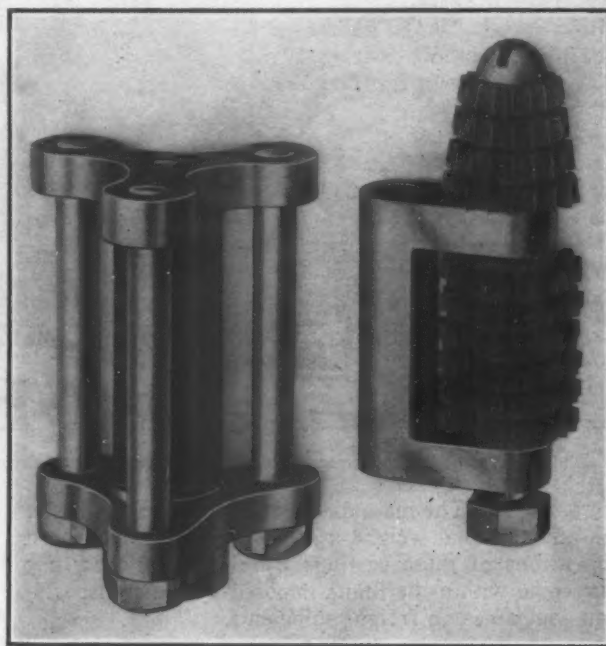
View Showing the Spider and One of the Swing Frames.
